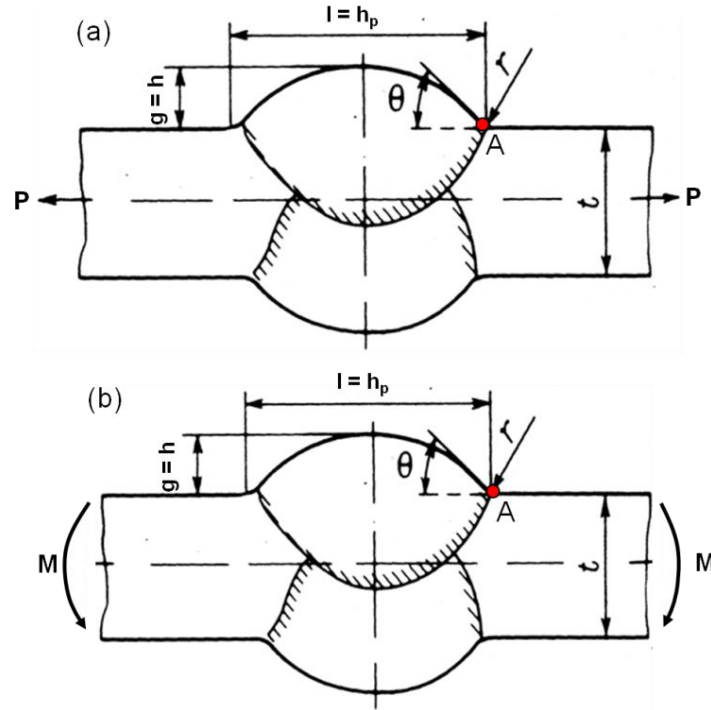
Symmetric butt weld under (a) axial load (b) bending load
